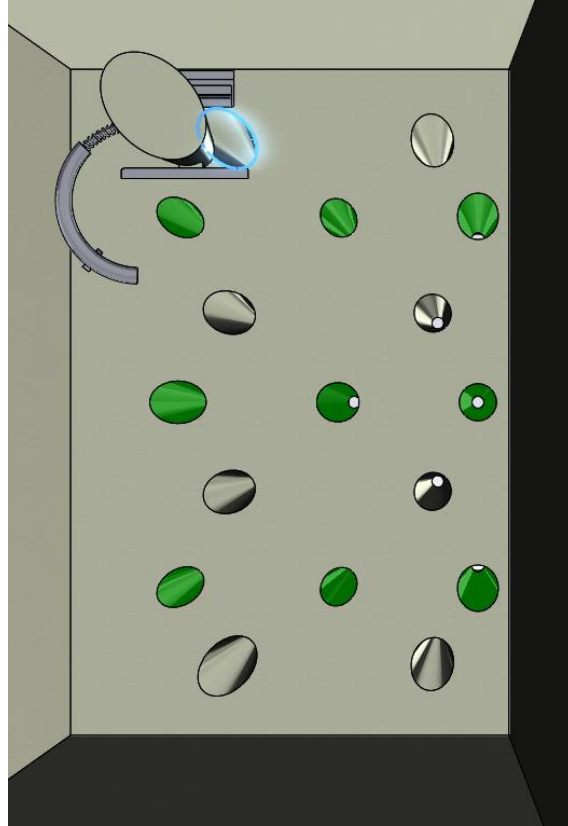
Bottom view of the aperture plate in the assembly showing the created shutter mechanism for the most oblique additional pinhole for multiplexing that is highlighted in blue.
